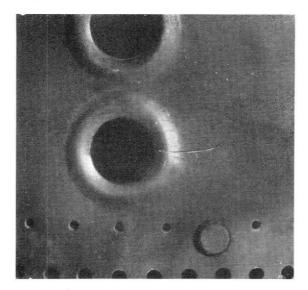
A repairable crack at one of the large air holes in the front section of the flame tube.
